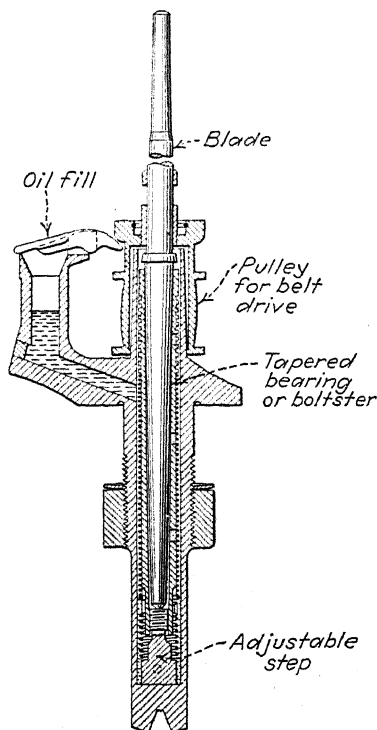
Textile-mill vertical spindle bearing, showing adjustable step. Oil reservoir surrounds tapered bolster provided with communicating oil holes. Entire tapered surface operates in an oil bath. (Courtesy Pure Oil Company.)
